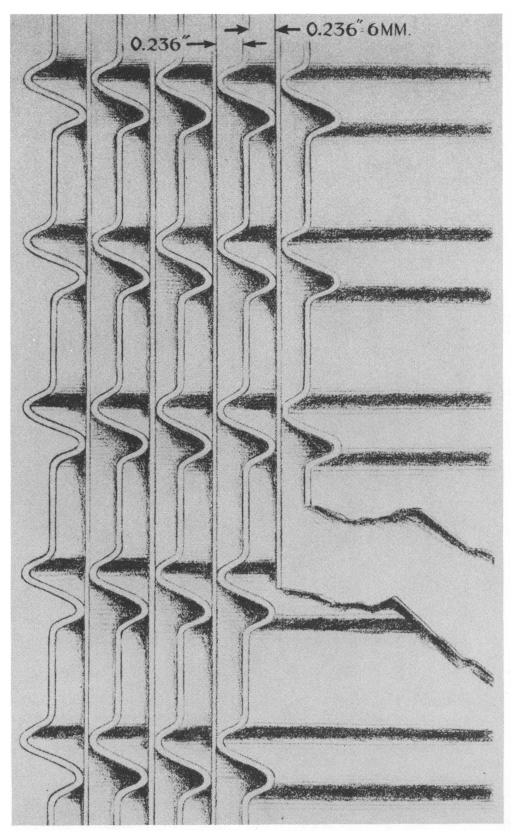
Shape of Alternate Flat and Notched Plates Used for Metal Test Plates in This Work.
